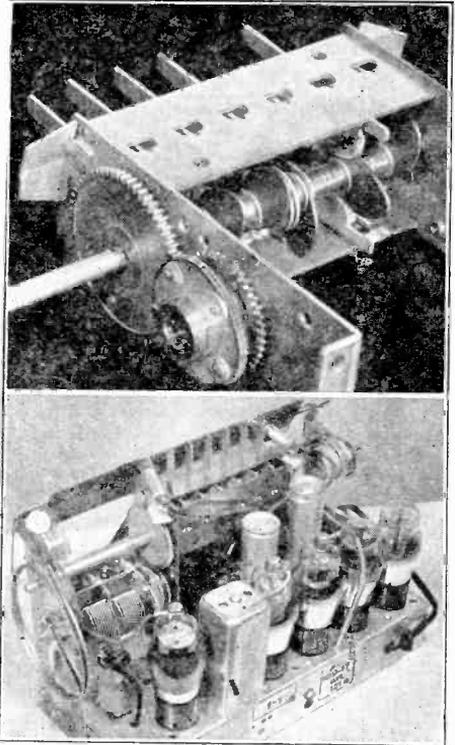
A (above). Mechanical automatic tuning unit used in a number of Philco receivers. One plunger is in its depressed position, and its forked end is holding the corresponding cam in the position shown in Fig. 5B.
